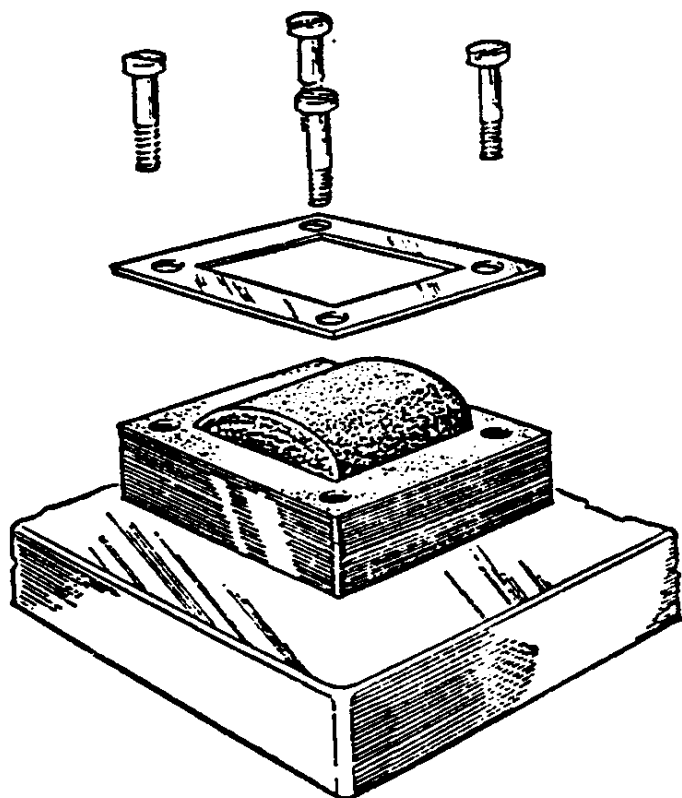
A method of clamping the finished transformer to the amplifier chassis.
